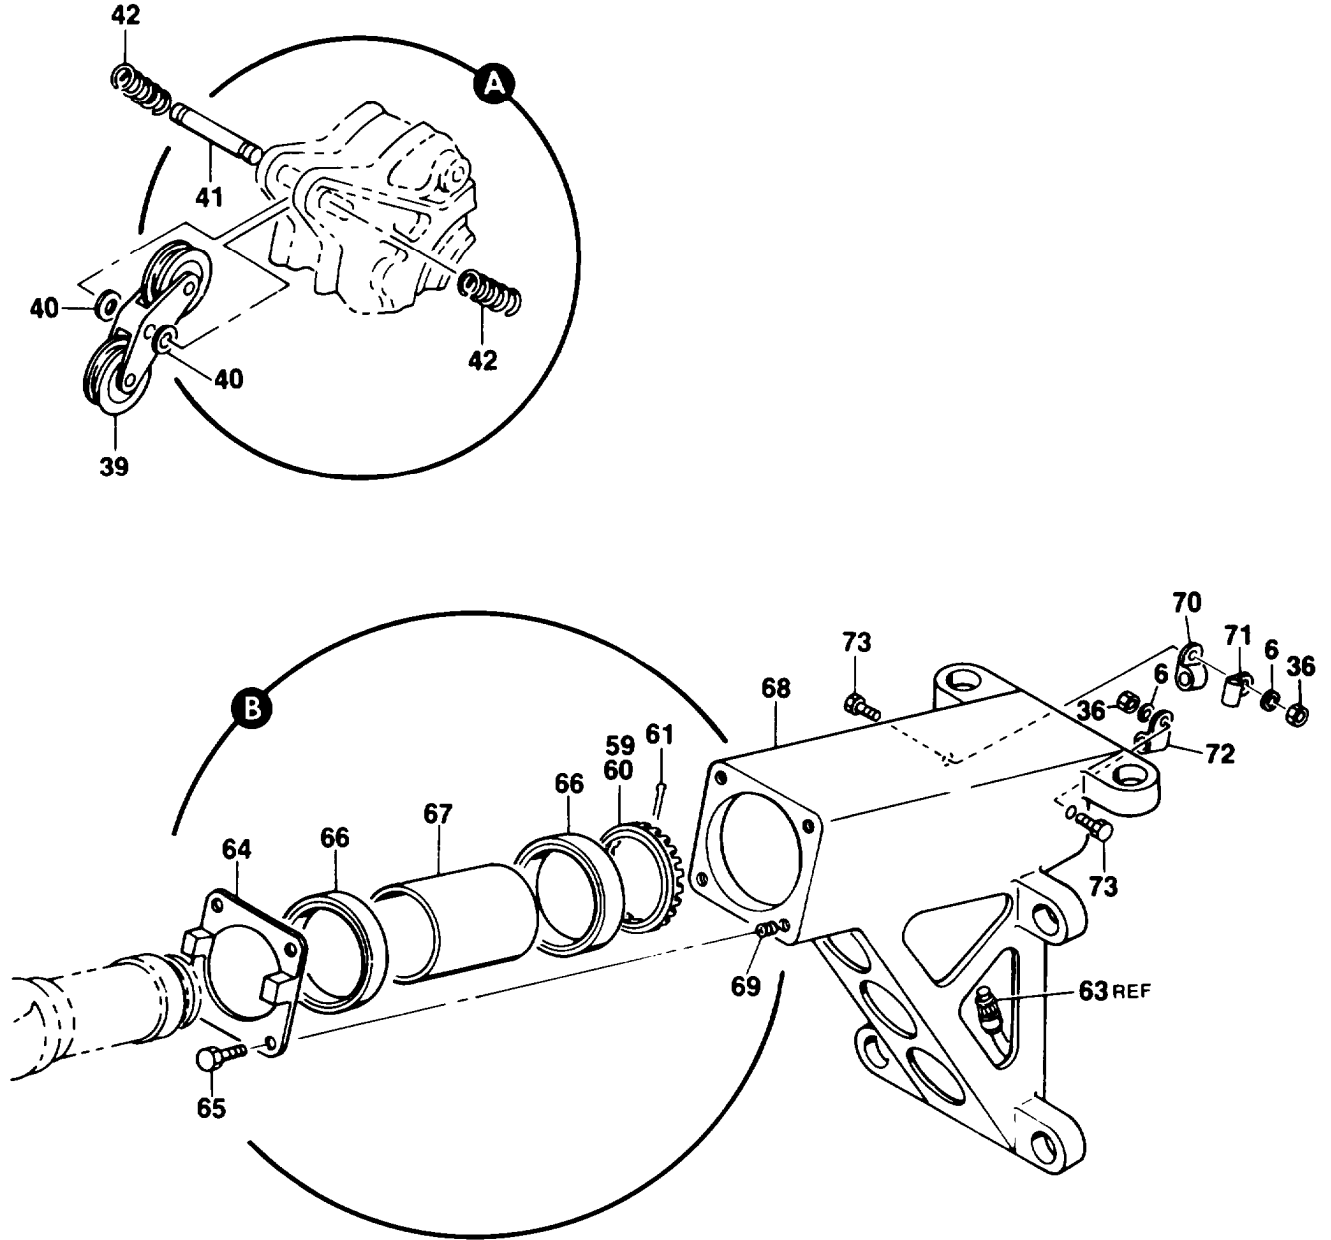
BOOM HEAD ASSY (SHEET 2 OF 3)
